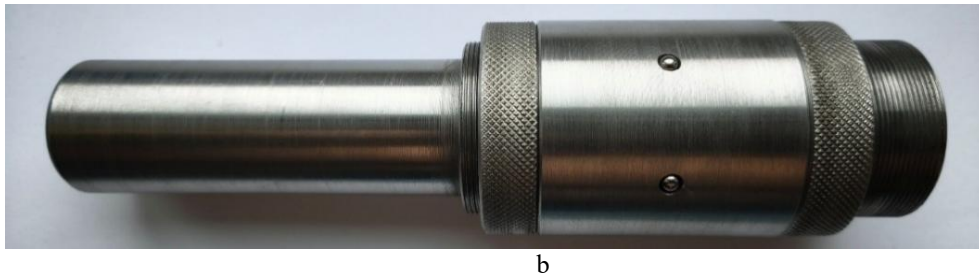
Tool for forming a regular micro-relief on the inner surface of connecting rod bearings:
